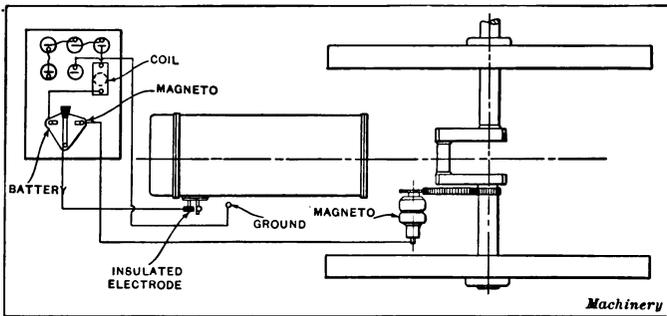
Wiring for Horizontal Engine with Batteries and Gear-driven Magneto
